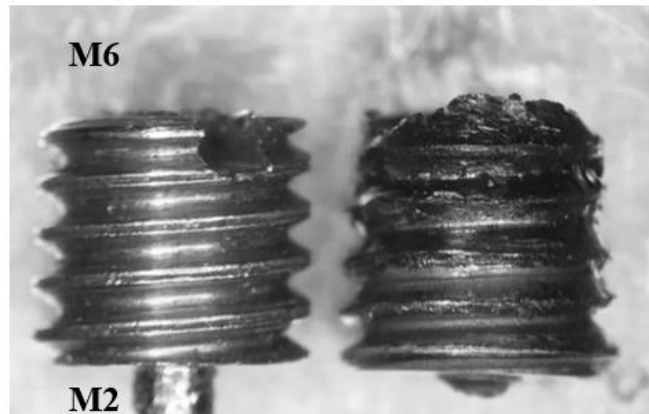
M2- M6 specimen-horn screw connection with a broken and burned example from ultrasonic fatigue testing.
